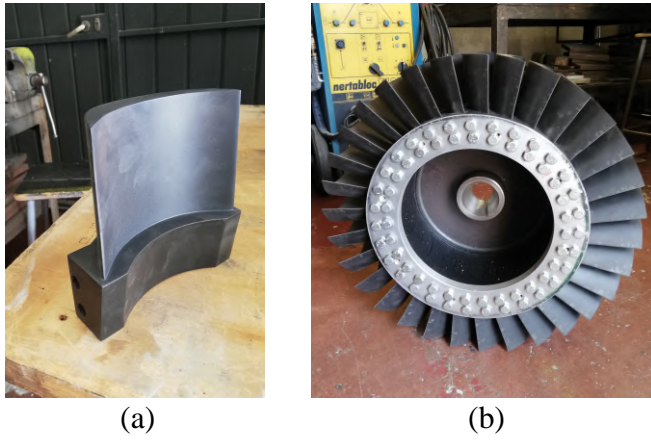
Rotor: (a) blade; (b) assembled rotor.
